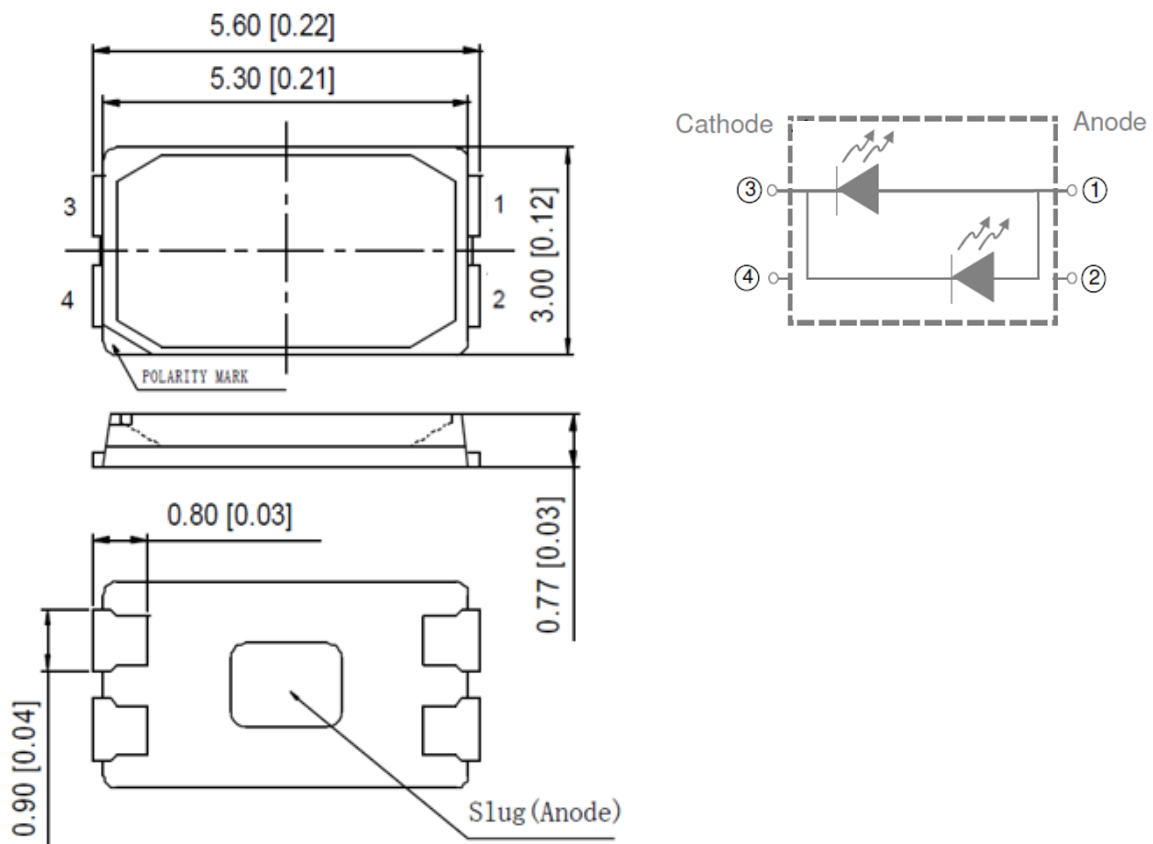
Mechanical drawings of the 5630 package, with unit in millimeter [in inches]
